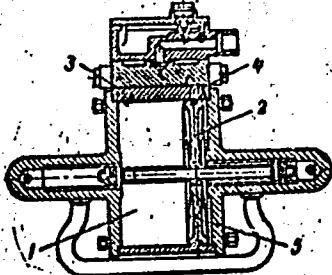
1 - pneumatic cylinder; 2 - piston; 3 and 4 - checking devices; 5 - blades
